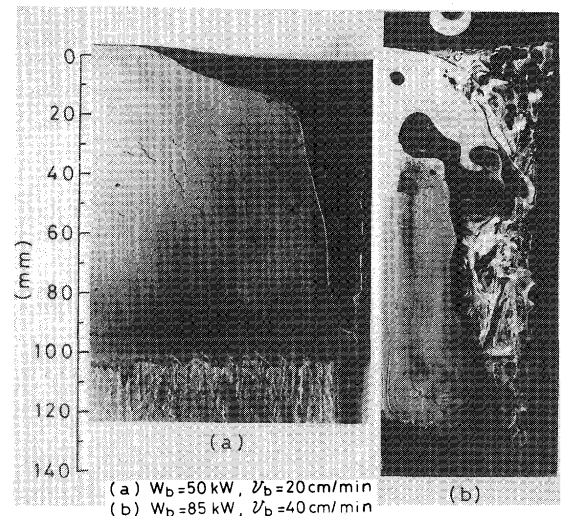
Bead sections indicating condition of violently shaken molten pool during flat position welding. ($\theta_d = 0$)
